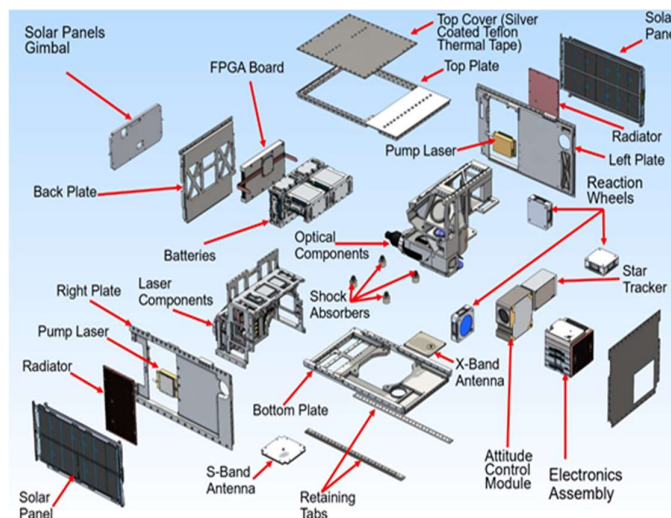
CubeSat exploded view indicating the subsystems and assembly units.
